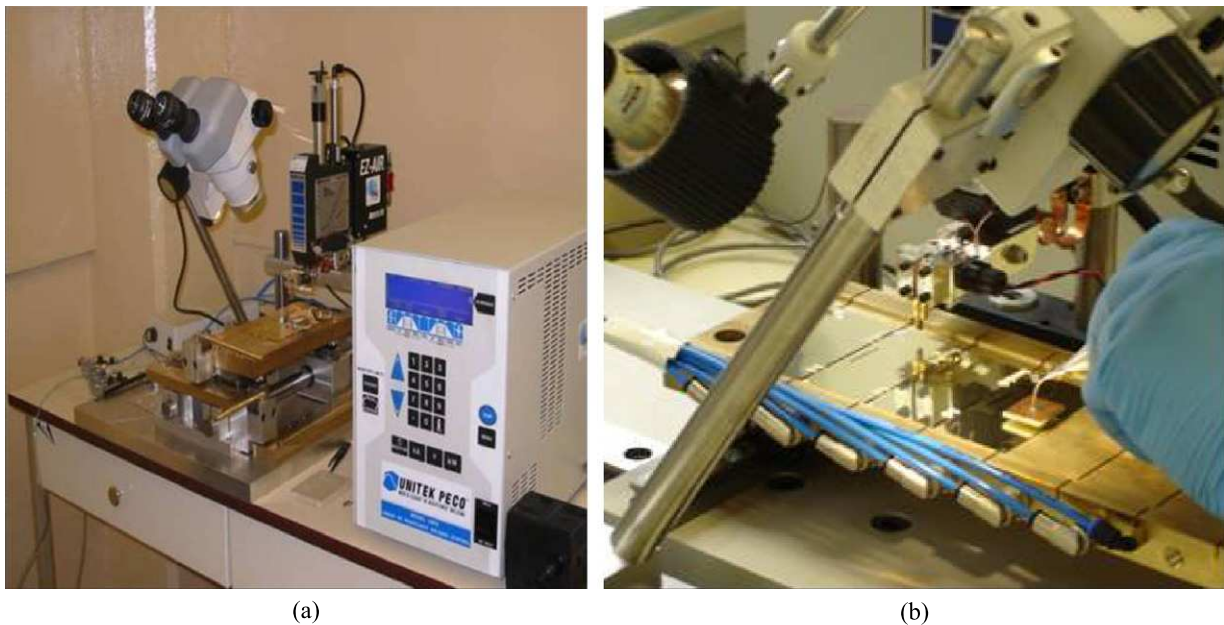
(a) Welding system. (b) Soldering process.
